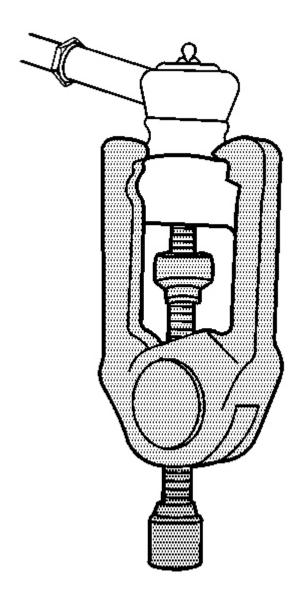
Removing Outer Tie Rod Assembly From Steering Knuckle Courtesy of GENERAL MOTORS CORP.
